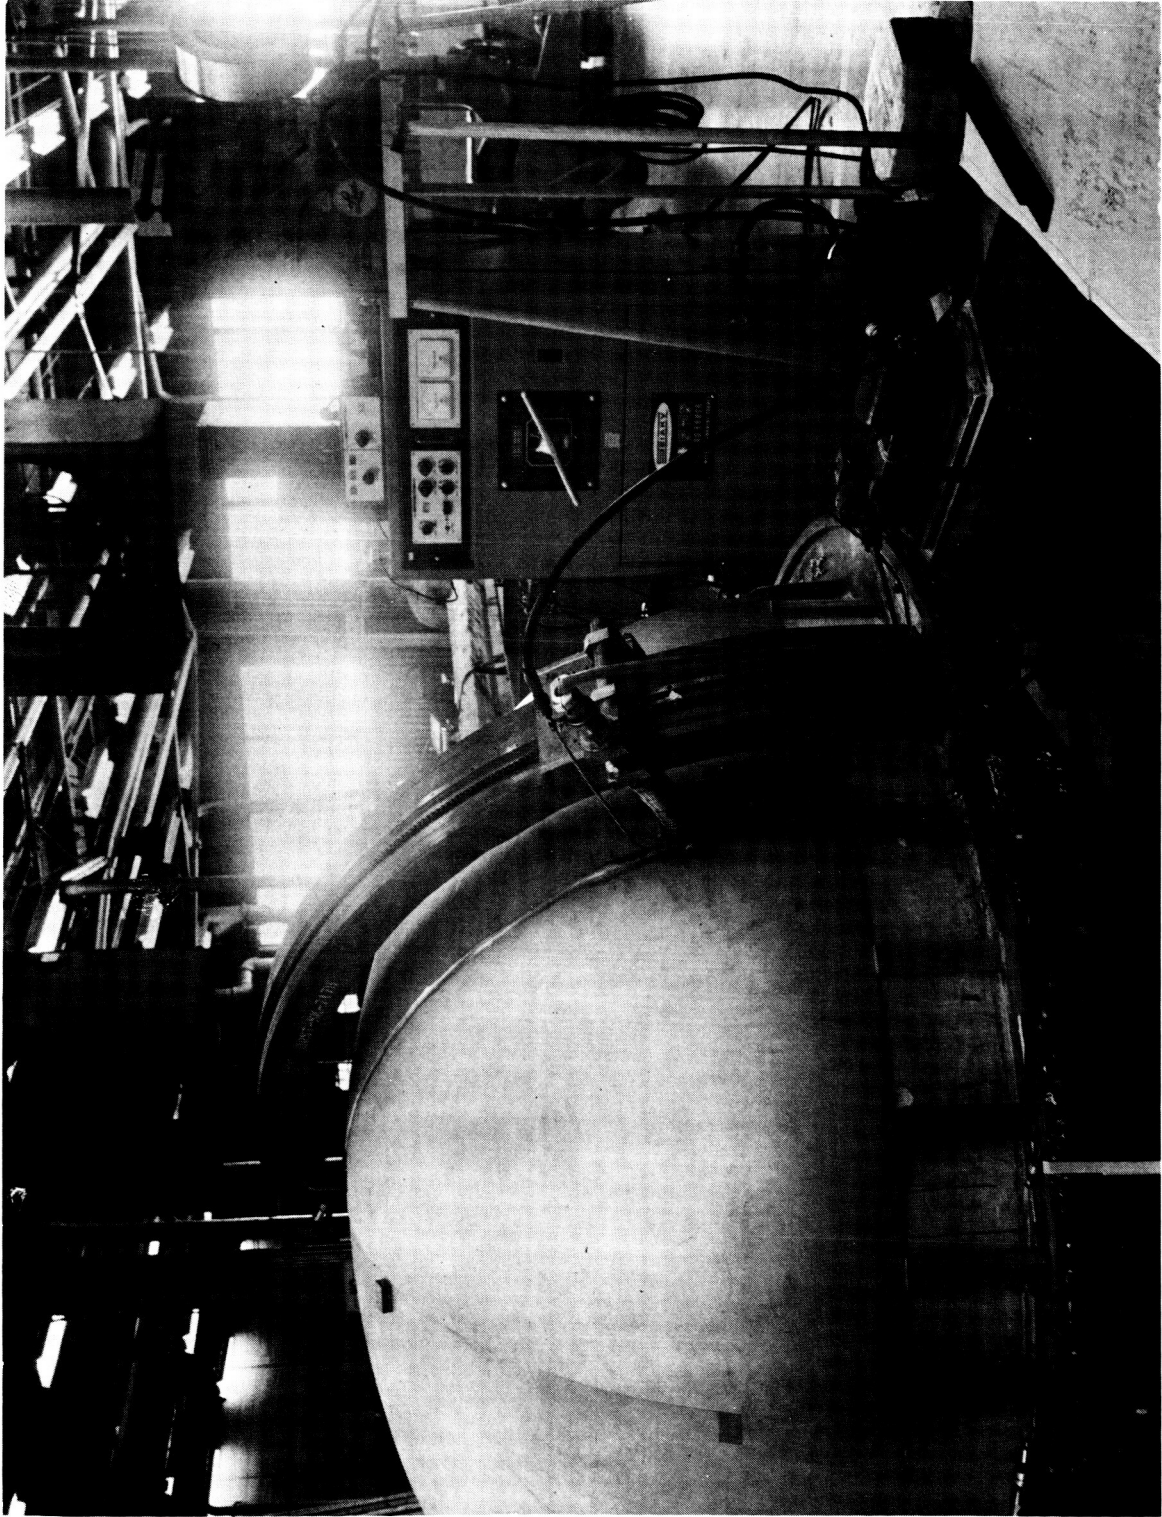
Concave Forming & Aging Tool XBAJ - MR&T - SK717B
